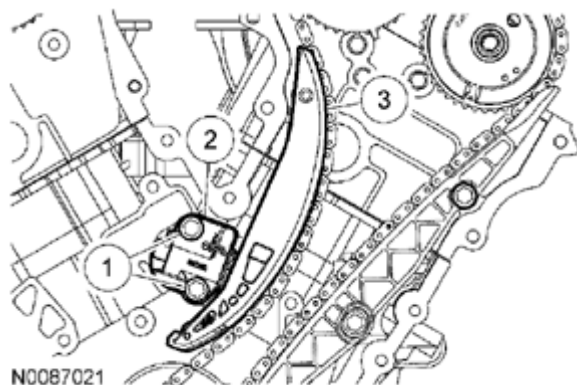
Identifying LH Timing Chain, Tensioner Arm And Bolts
